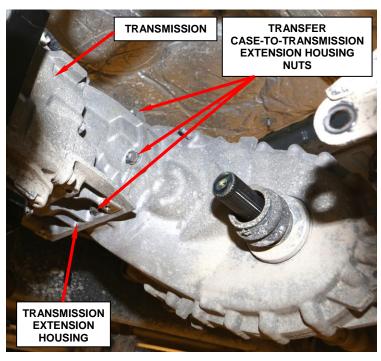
Transfer Case-to-Transmission Extension Housing Nuts
